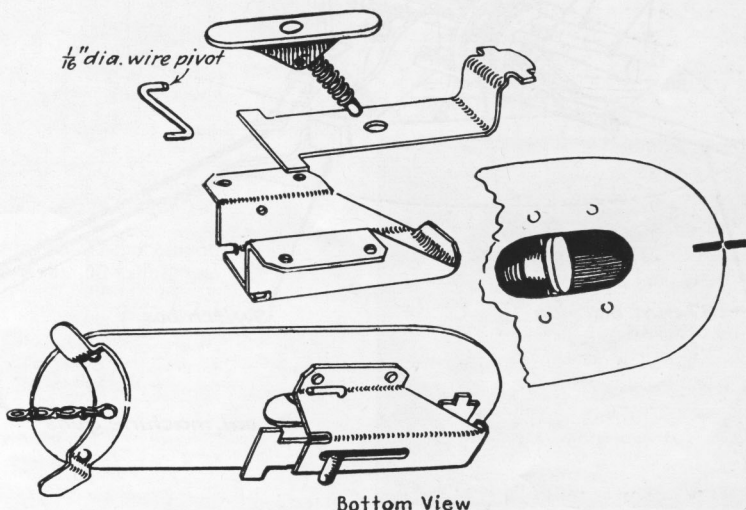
Detail sketch showing the latches used to fasten the cover plate to the oxygen-supply system. The Hamp has very few openings, but most of them are of this quick-opening type.
